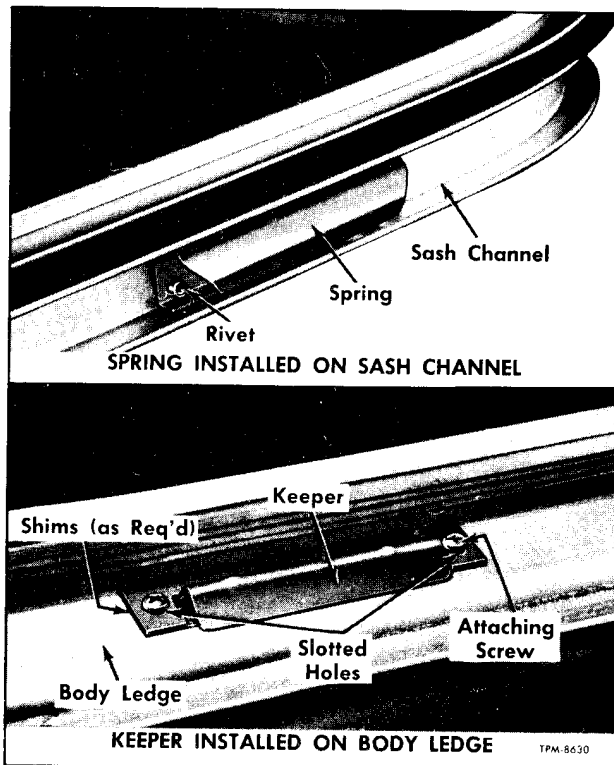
Long Side Sash Push-out Spring and Keeper Installed
